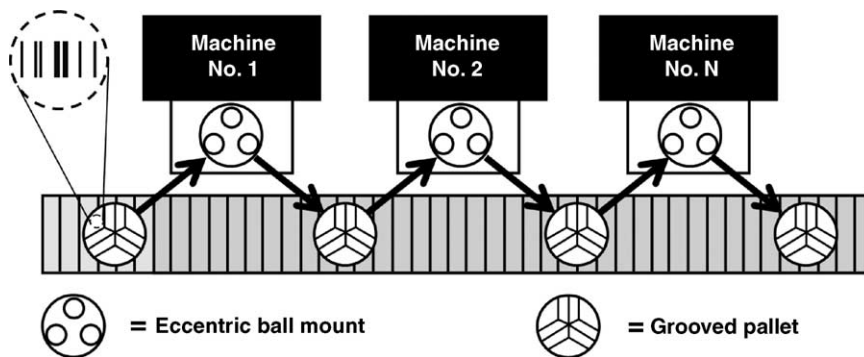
Precision machining process with precision, palletized kinematic fixtures.
